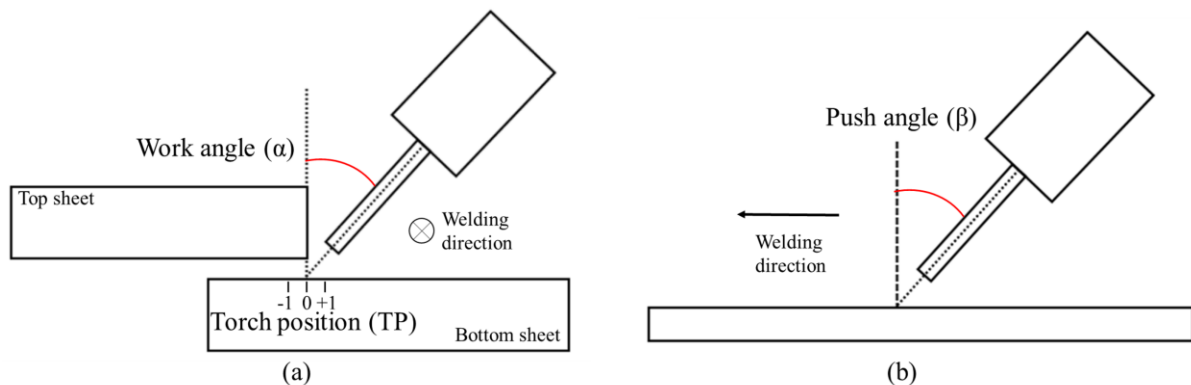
Definition of torch angle and position: (a) torch position (TP) and work angle (α) (welding direction is into the page); (b) push angle (β).
